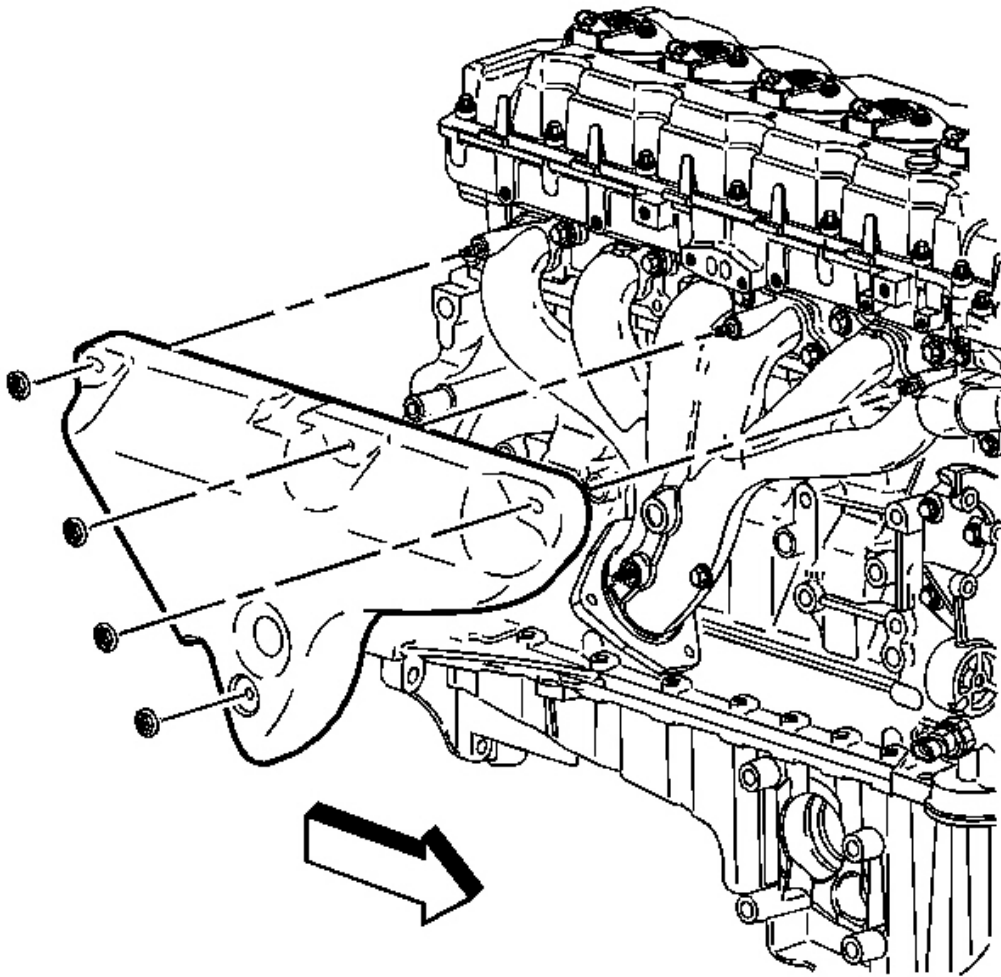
View Of Exhaust Manifold Heat Shield & Nuts
